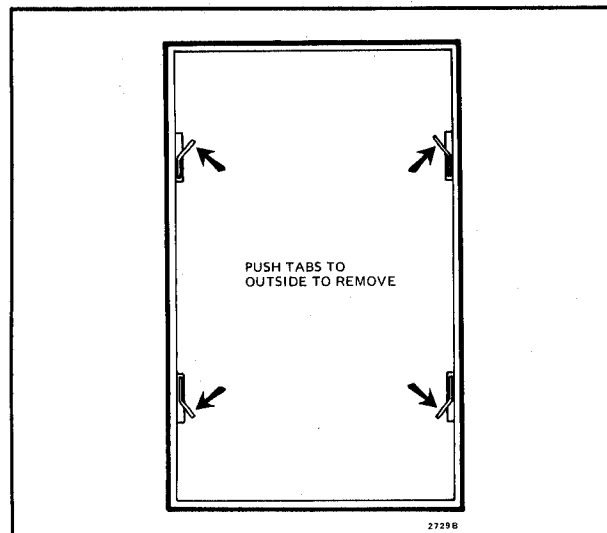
CHANGING COVER PLATE FOR HORIZONTAL MOUNTING.
